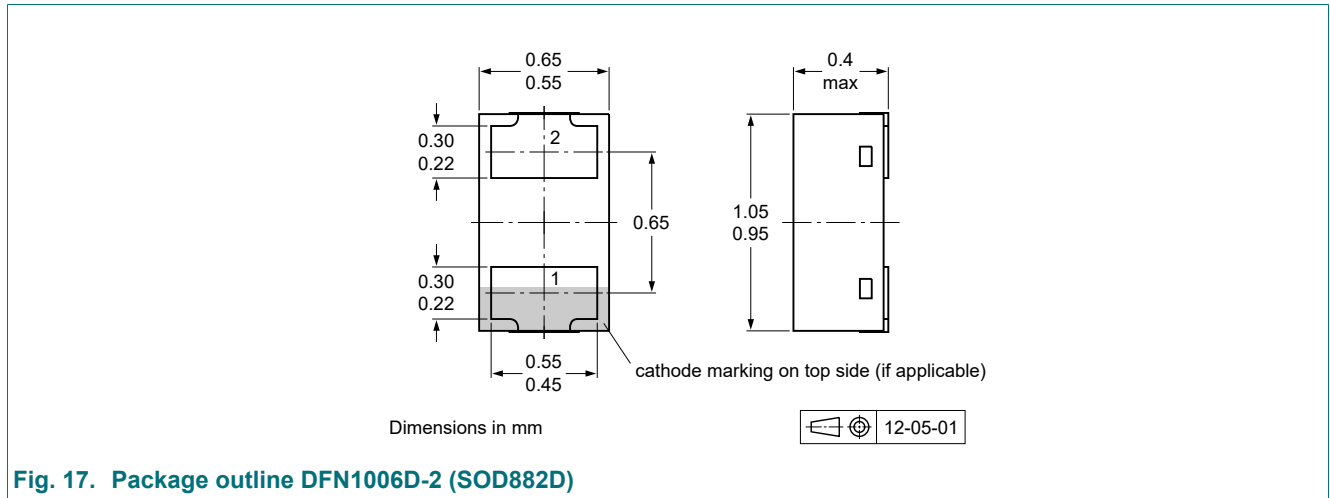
Package outline DFN1006D-2 (SOD882D)
